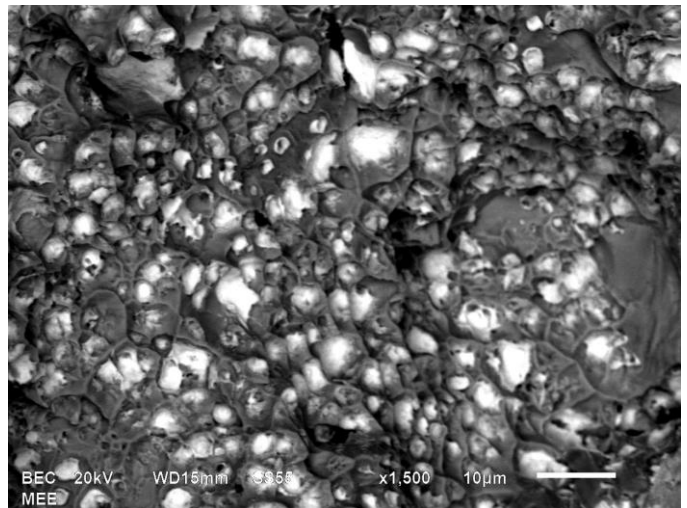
1500X Fracture Surface of Fitting 1 – Backscatter Mode
